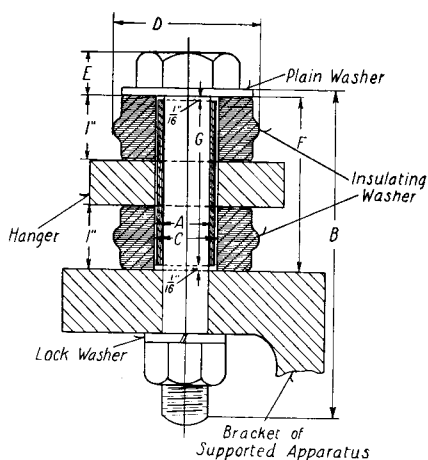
Insulated Mounting Bolts for 600-Volt Mounting of Control Boxes, Etc.
